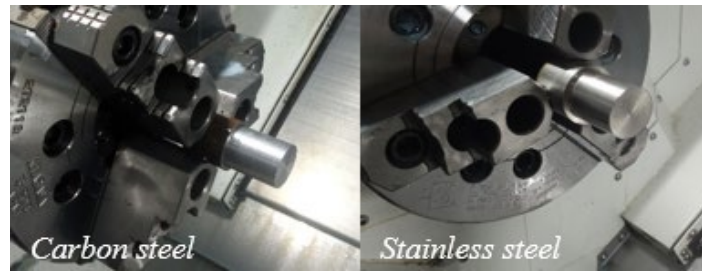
The results of the finishing process for carbon steel and stainless steel materials
